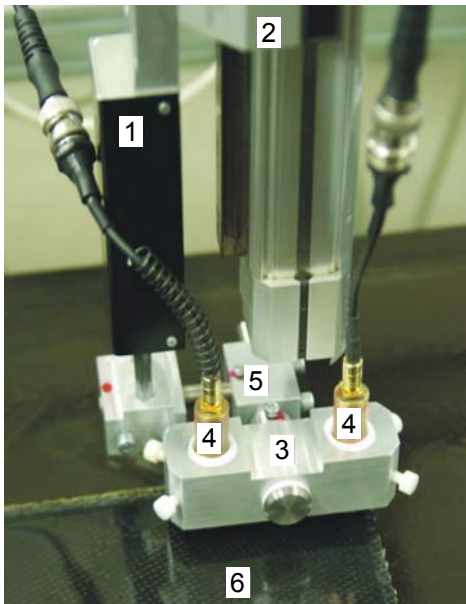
The view of the moving part of the tandem transducers system: 1 - adjuster; 2 - scanner carriage; 3 - support; 4 - the transmitting and receiving transducers; 5 - rotation axis; 6 - object under investigation
